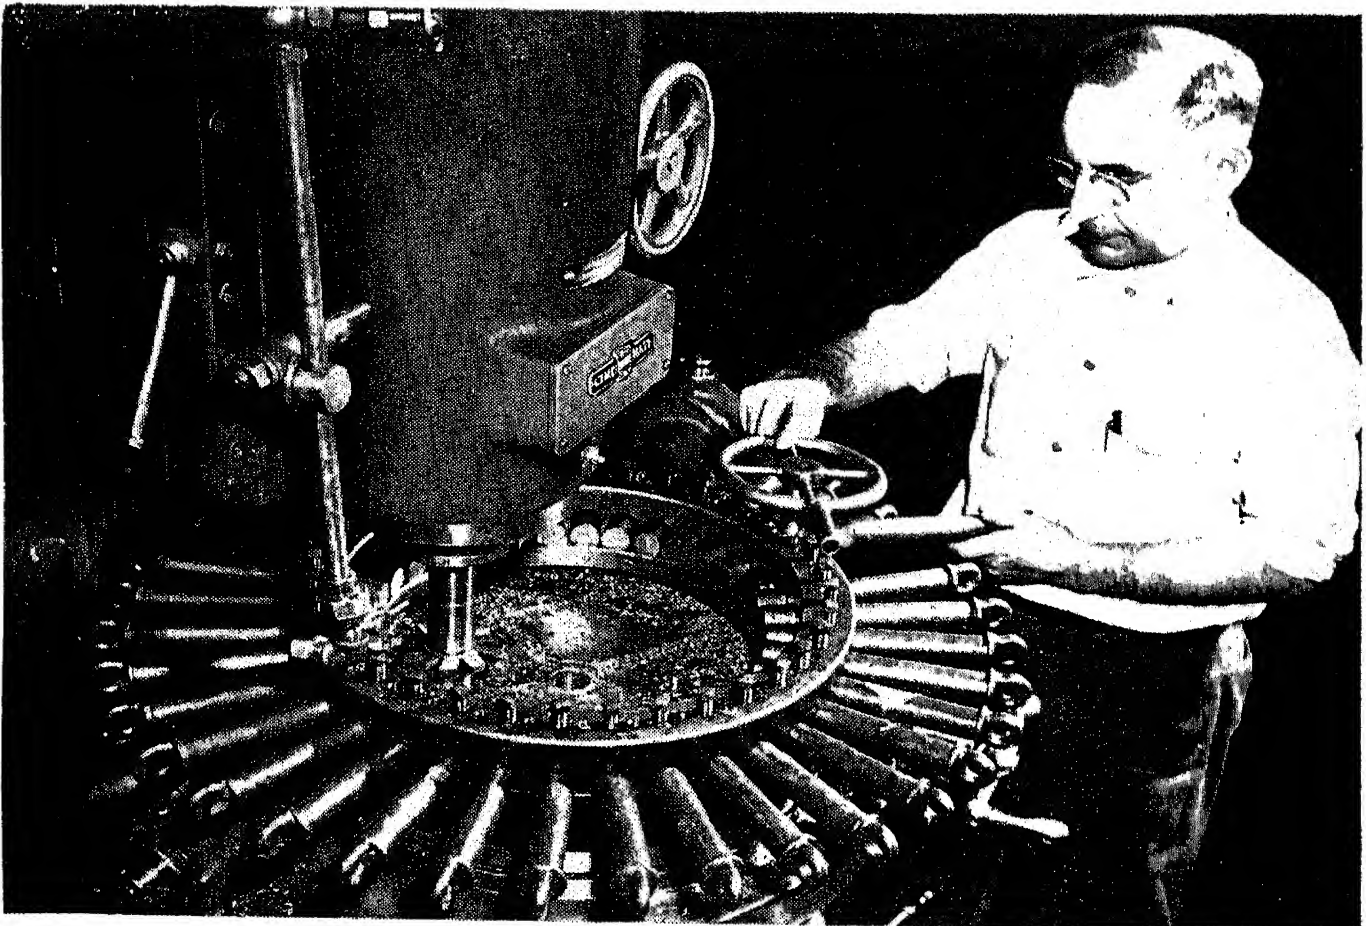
A multiple station fixture mounted on a power driven circular milling attachment for continuous rotary milling. (Courtesy The Cincinnati Milling Machine Co.)
